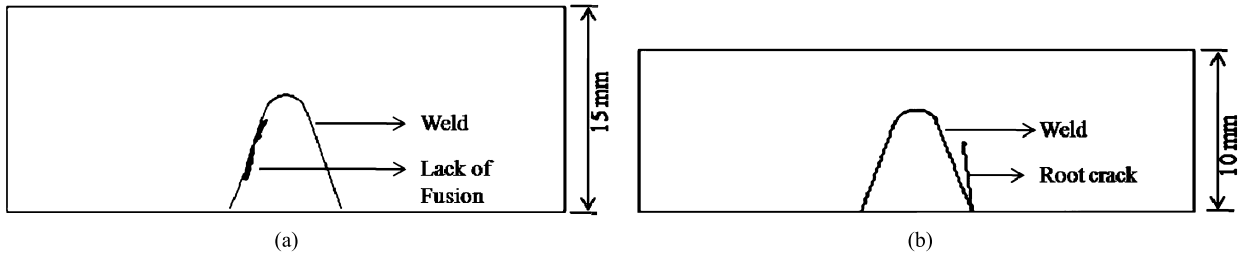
Implanted planar weld flaws (a) lack-of fusion and (b) root crack.
